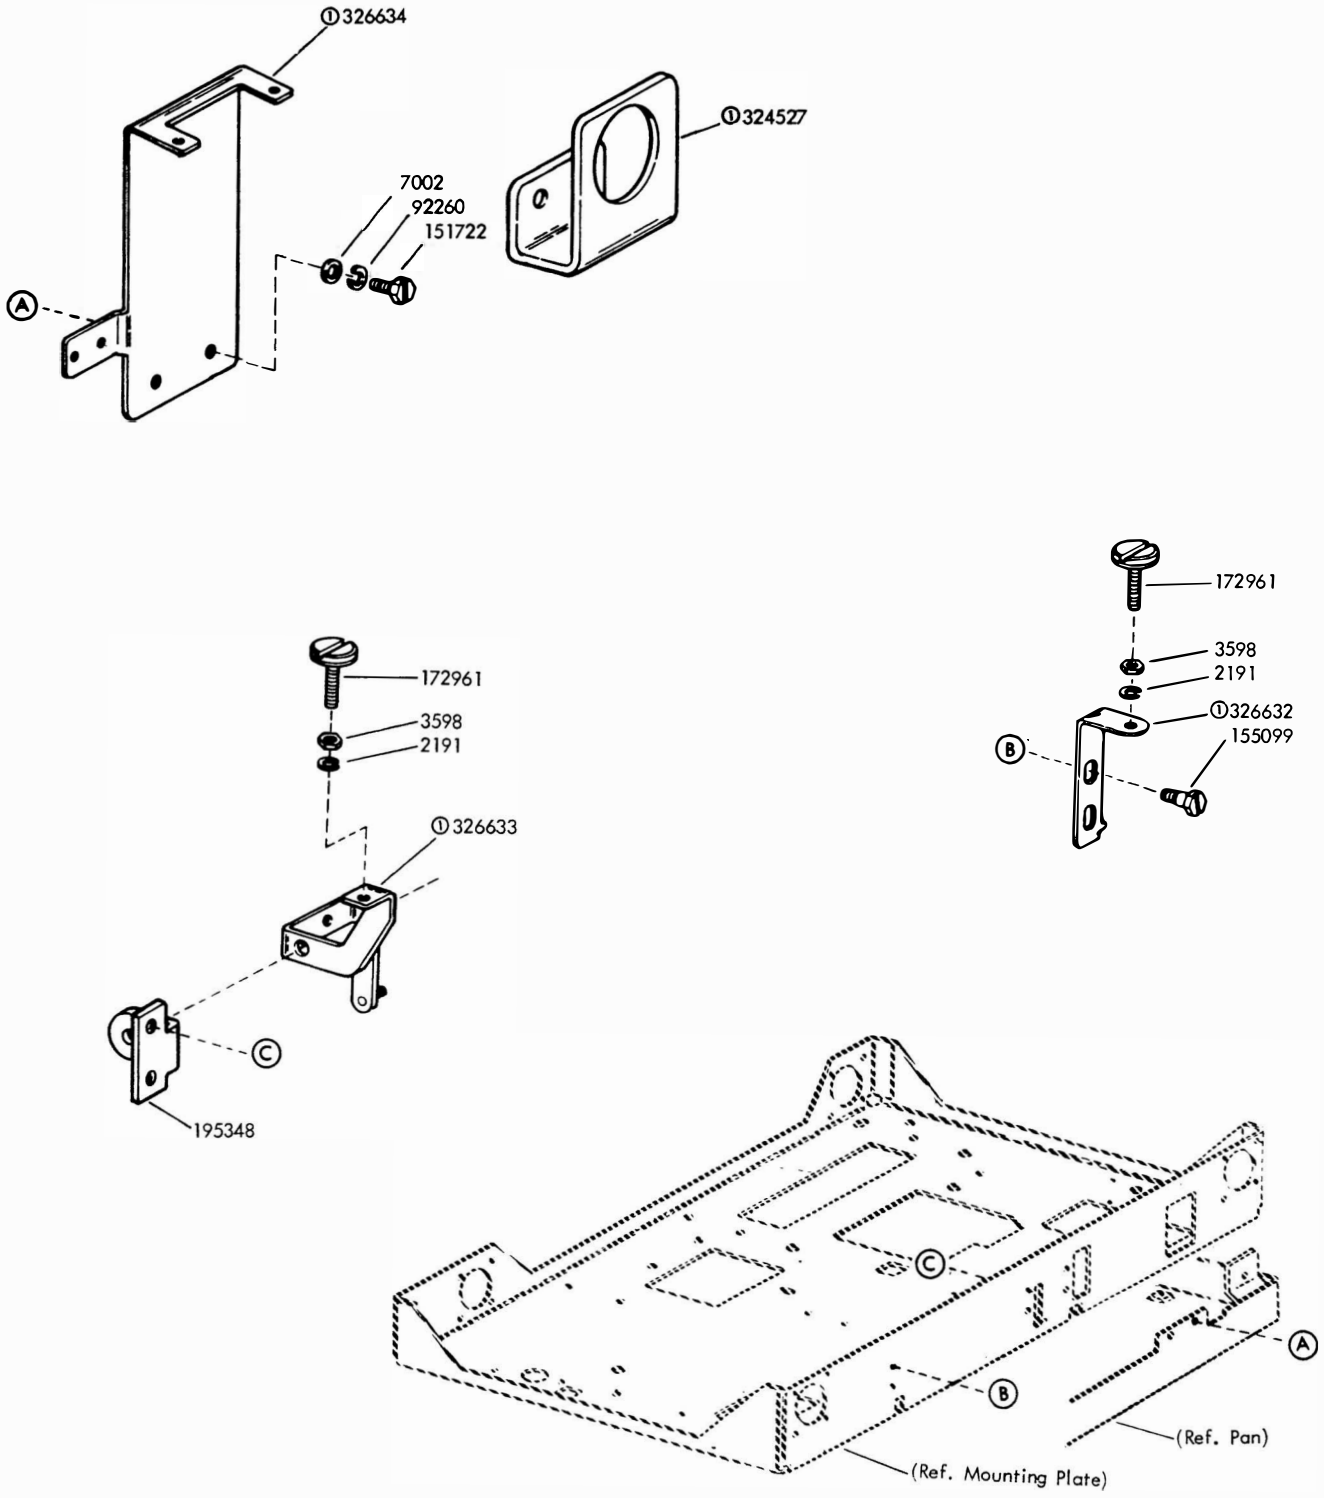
MOUNTING COMPONENTS FOR CONTACT BOX CABLE (LAK)
